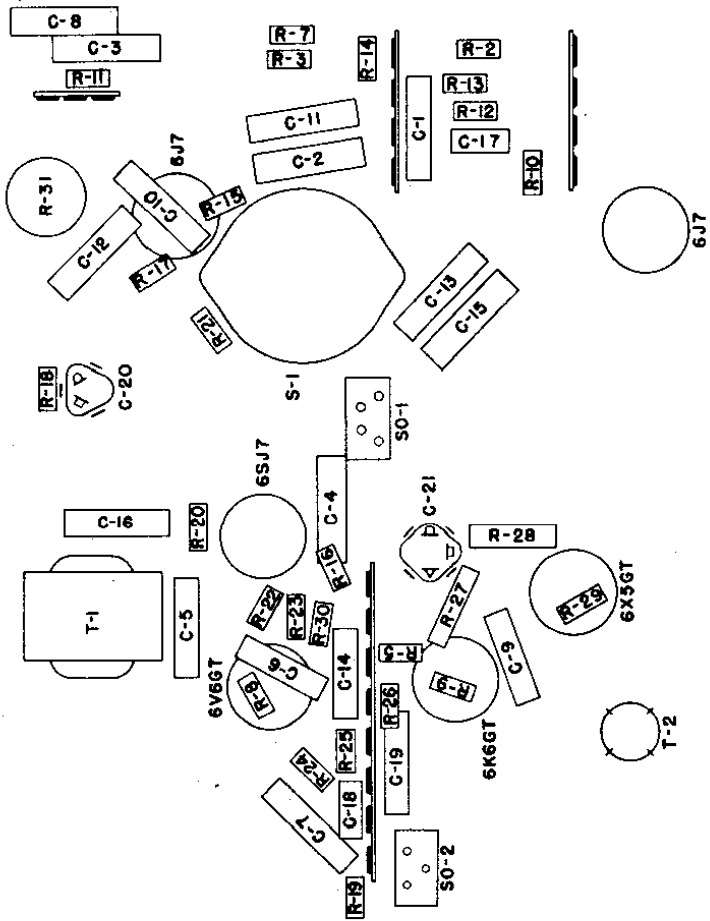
Electrical Component Locations, Bottom View of Amplifier.
